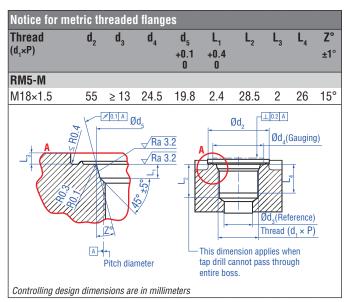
Notice for metric threaded flange M18×1.5-6g based on DIN ISO 6149-1
